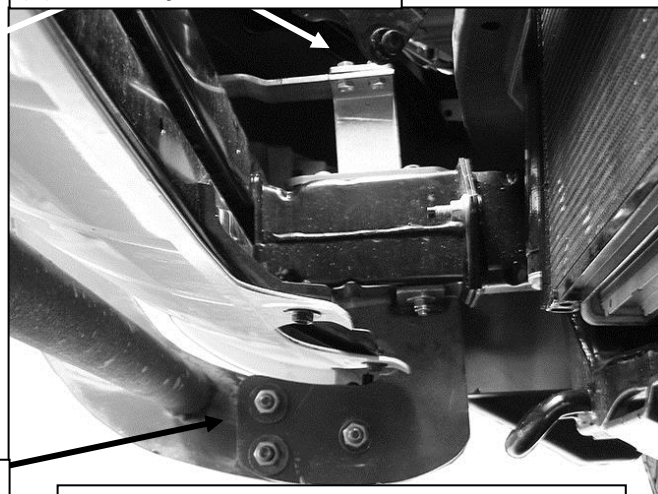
Attach passenger/right Mounting Bracket to bumper bracket (viewed from above)
